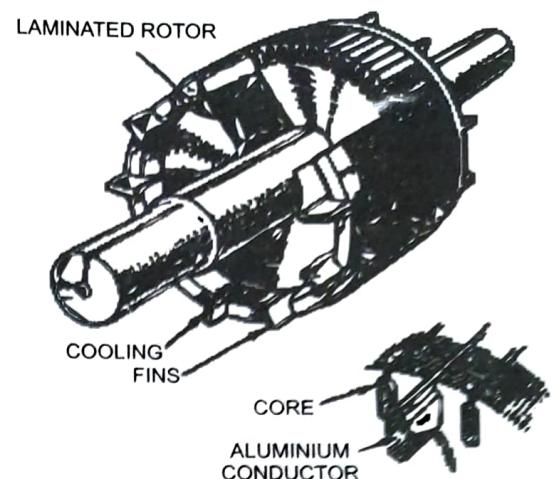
Cutaway View of Squirrel Cage Rotor
